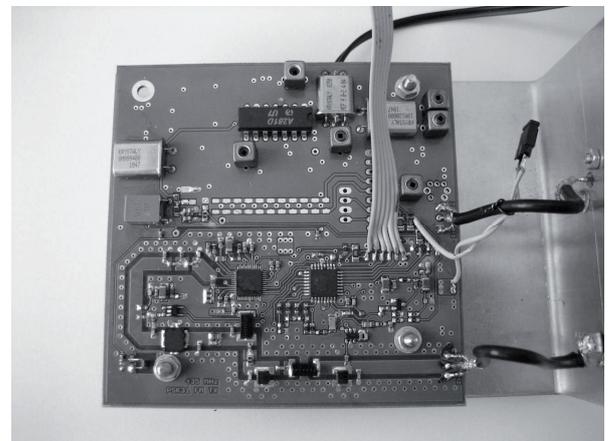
The prototype board attached to a test-bed with connected programming cable.
